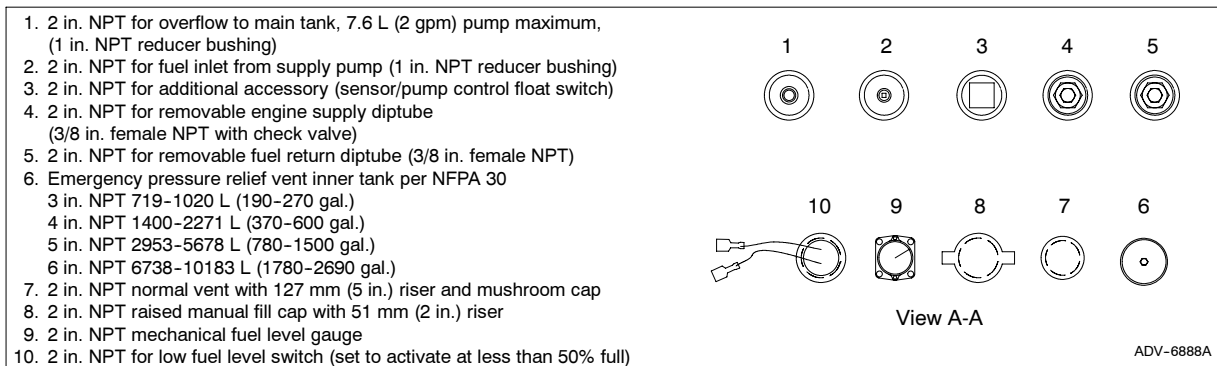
275-500REOVZ and 350/400REOVZC Fuel Tank Fittings Top View (Figure 1, View A-A, Right Side of Generator Set)
